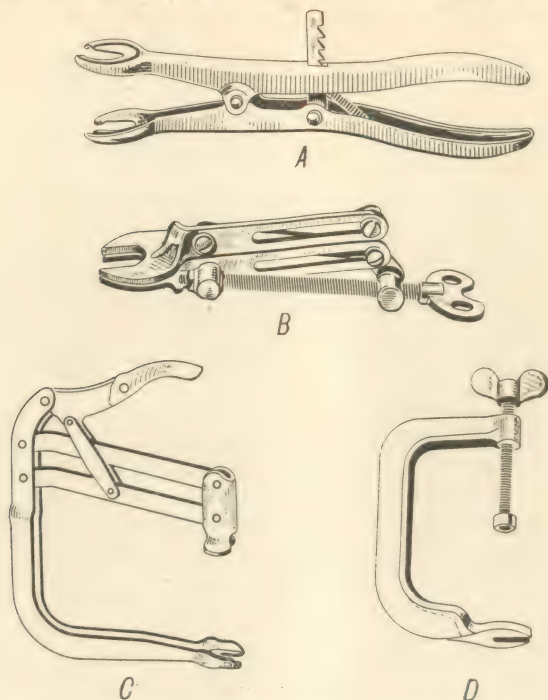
TYPICAL VALVE SPRING COMPRESSORS FOR HOLDING SPRING IN COMPRESSED STATE
